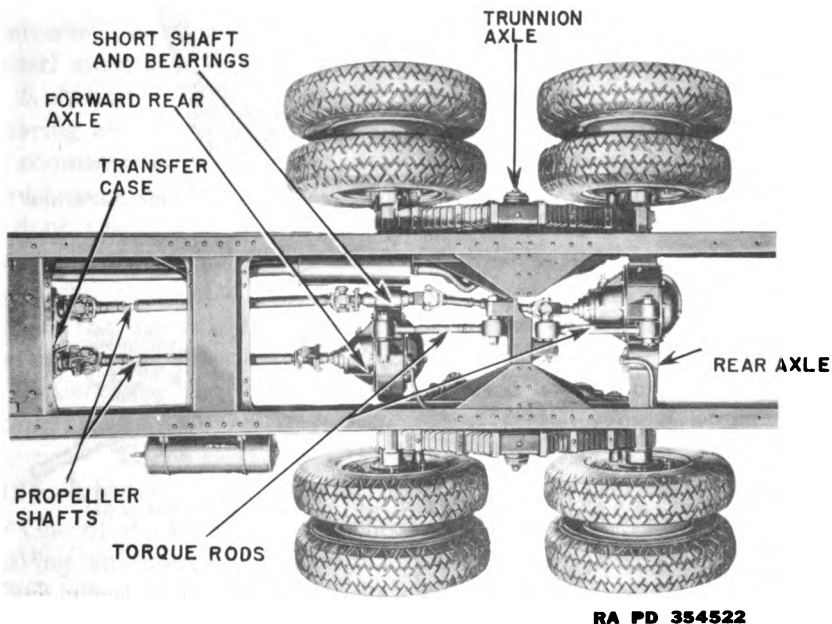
Bogie Four-wheel Drive with Independent Propeller Shafts.
